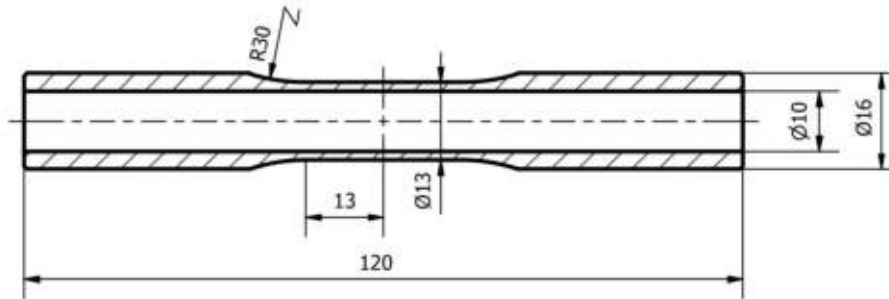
Dimensions of PA38-T6 specimens, given in millimeters.
